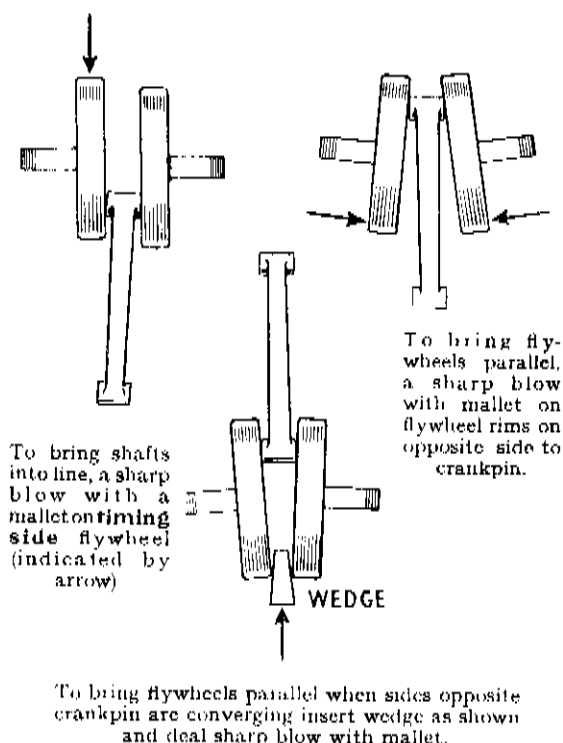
Method of correcting flywheels out of alignment. Note that above illustrations are greatly exaggerated.
